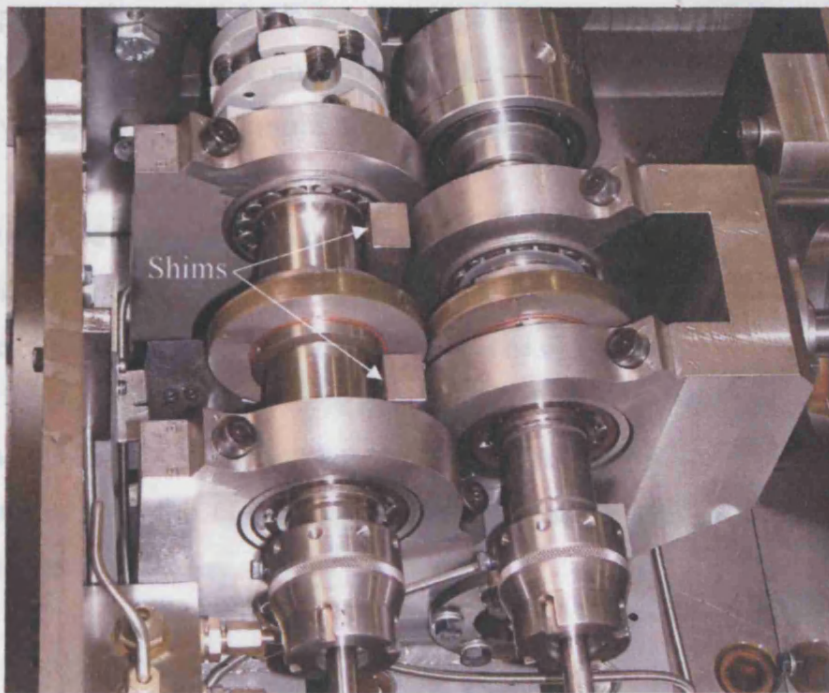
Shafts and coupling used to drive the shaft encoder
